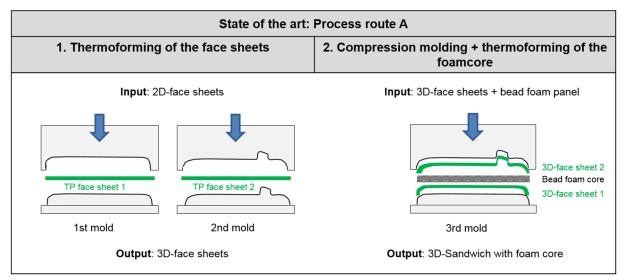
Schematic sketch of conventional technology for manufacturing 3D-sandwich structures.
